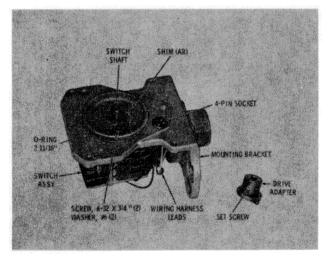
Mounting Bracket and Shaft-End of Switch
